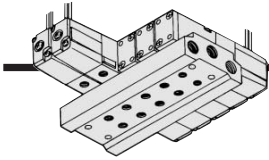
Hook this part onto the DIN rail and press down until a click is heard.
